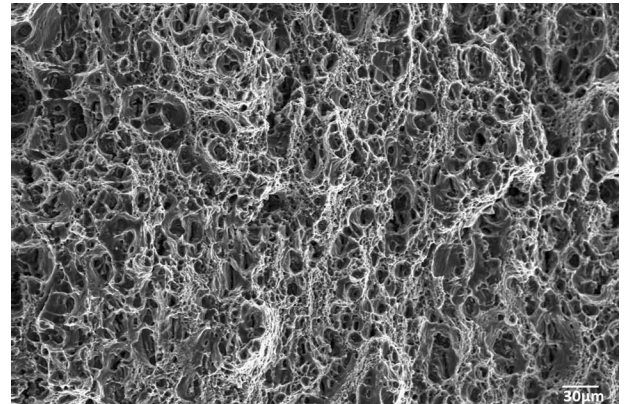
High magnified image of the fracture surface shown in Fig. 169 indicating the presence of fine and coarse dimples throughout the surface
